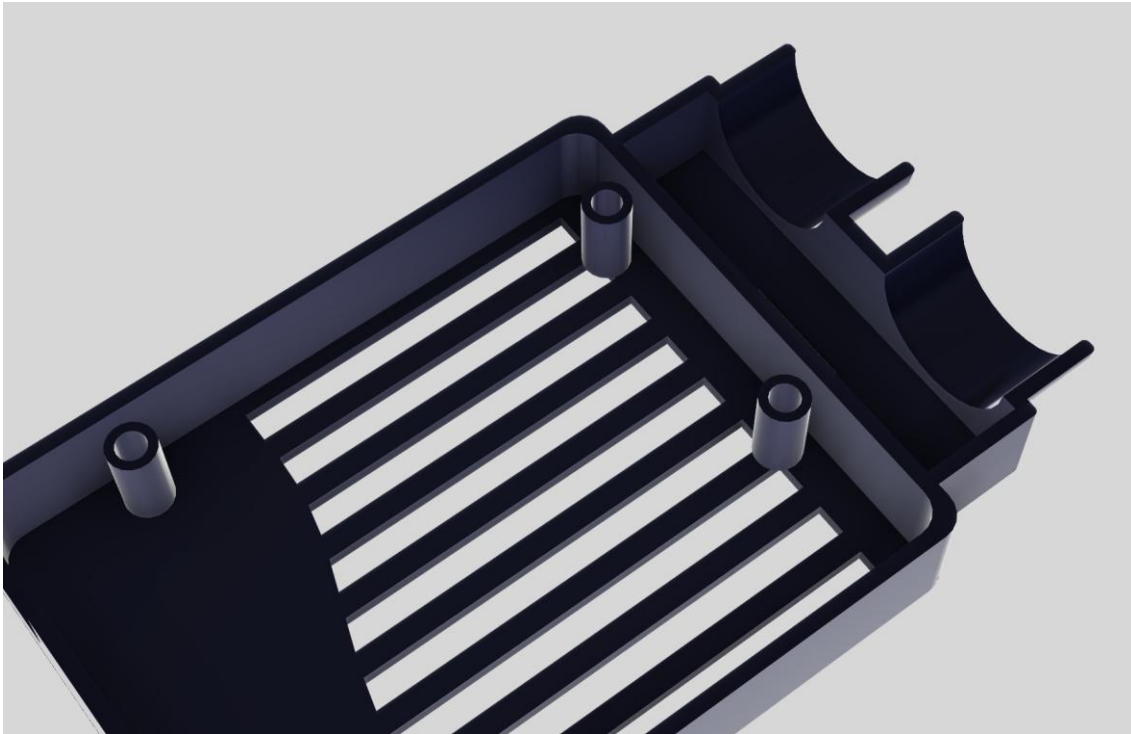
3D model of the enclosure highlighting mounting pin receiving hole
